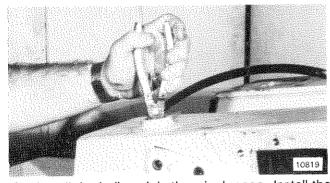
DISASSEMBLY OF THE WINCH (5 of 5)
